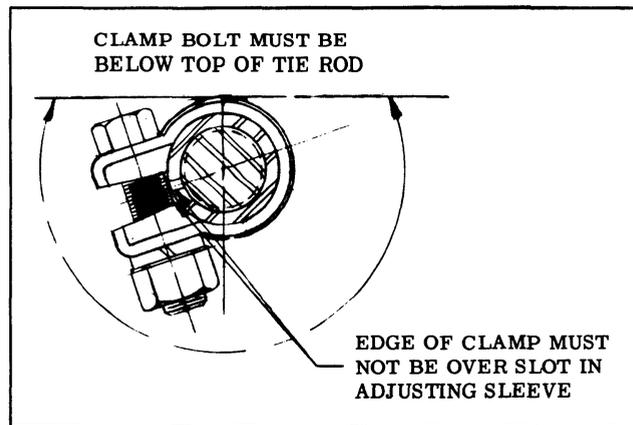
Adjusting Sleeve Clamp Positioning
